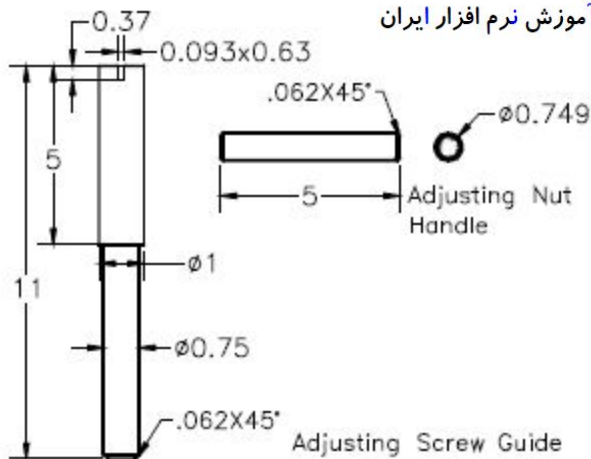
Views of the Adjusting Nut Handle and Adjusting Screw Guide
